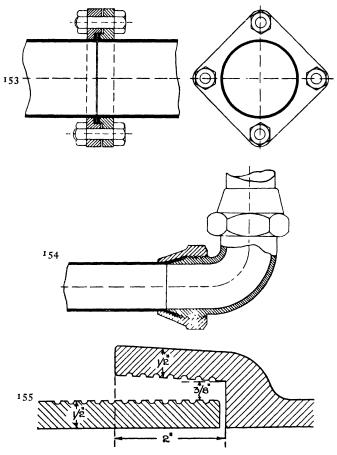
Four-bolt flange joint for light copper pipes exceeding 2½ in. in diameter.
